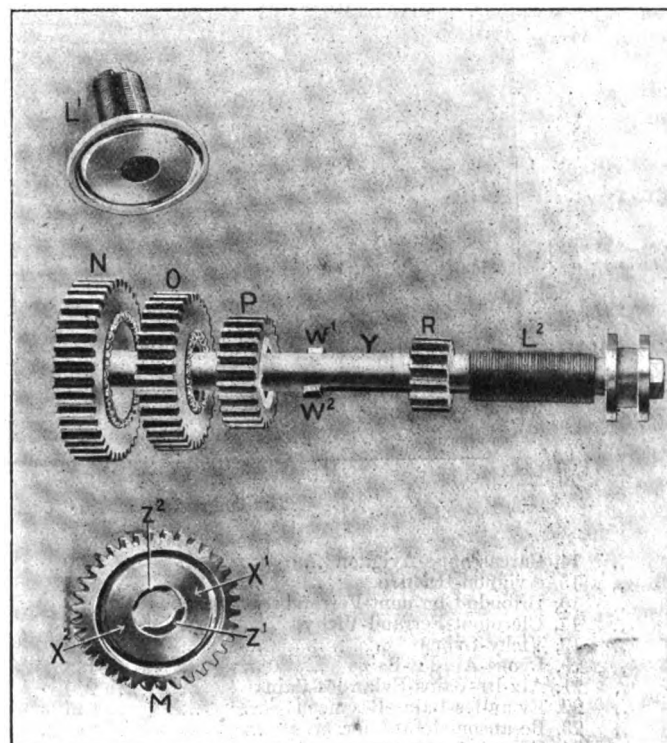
Details of Side Shaft of Crepet Change-Speed Gear.
